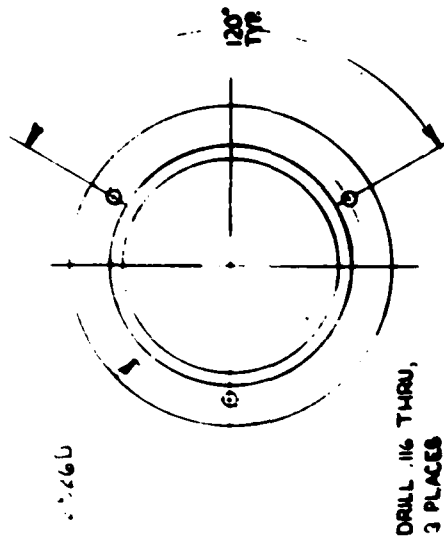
Micro-Switch Actuator and Mounting Plate.
